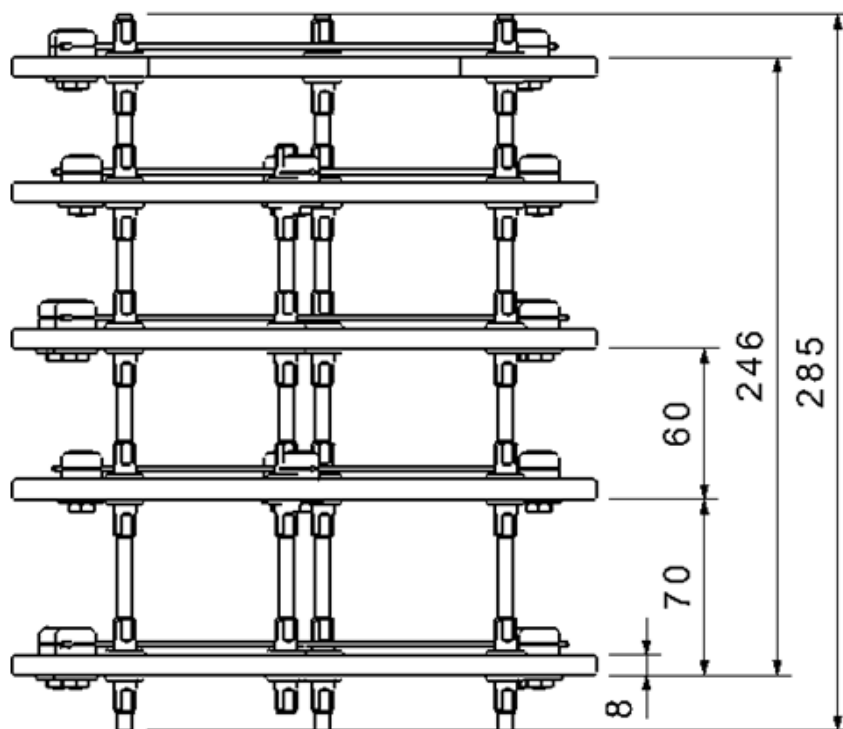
The main dimensions of the 3rd concept of fixator – front view
